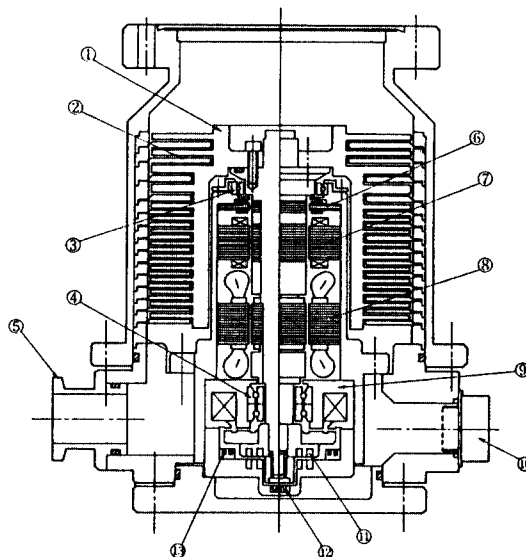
Sectional drawing of TMP (1 axis controlled : Turbovac 340M).
